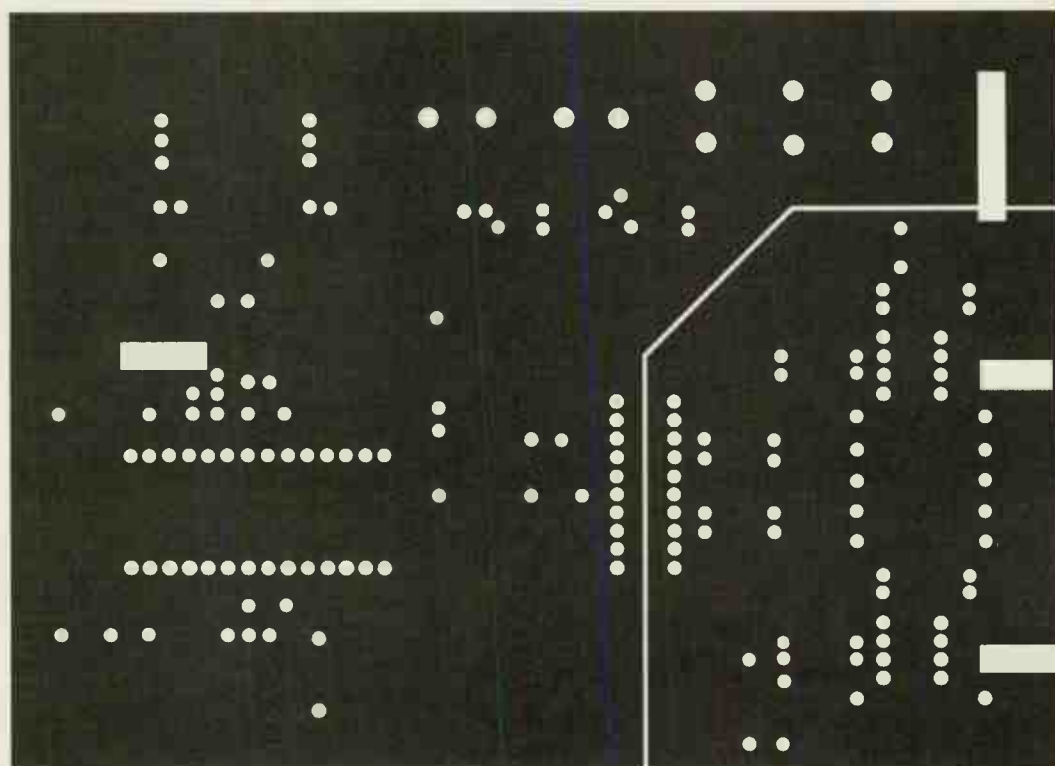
This shows the PCB ground plane from the component side. Both PCB diagrams are at 100% of real size.
